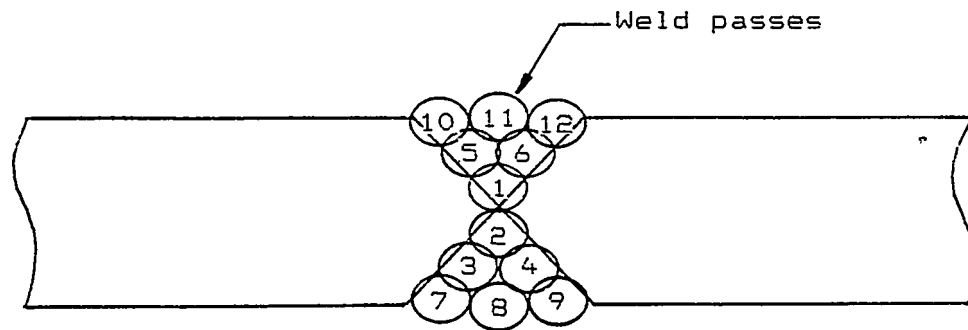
Alternating of passes to each side of a multi-pass butt weld to minimize angular distortion
